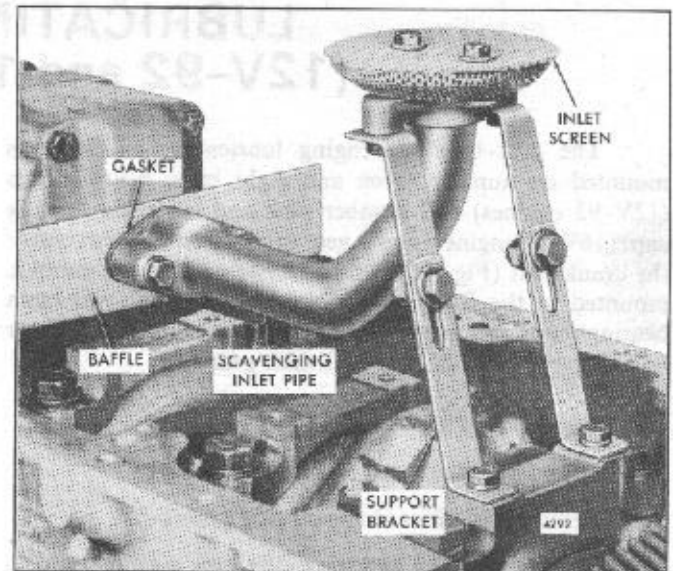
Scavenging Inlet Pipe and Screen Mounting
